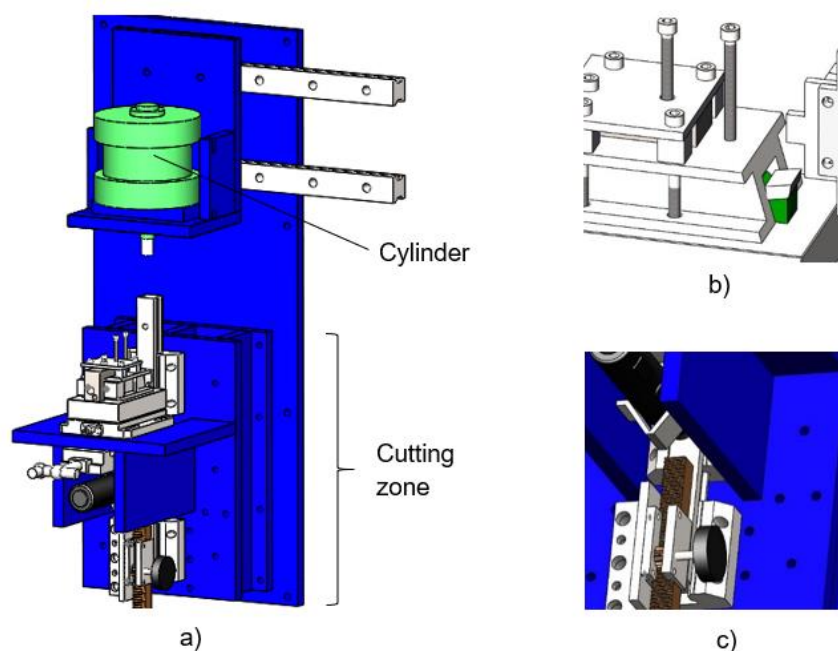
CAD model of the: (a) Orthogonal cutting tribometer; (b) Detail of the cutting tool holder and cutting tool; (c) Detail of the grinding zone, on the bottom of the cutting zone of the machine
